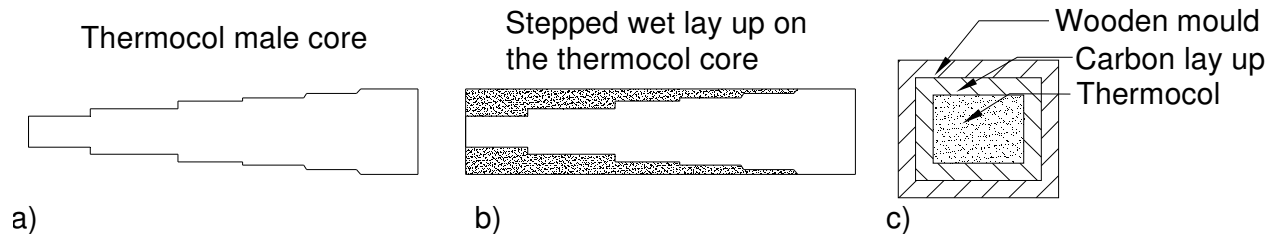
(a) Male thermocol core, (b) Stepped carbon wet layup on thermocol male core, (c) Assembly of wooden mould, carbon layup & thermocol.
